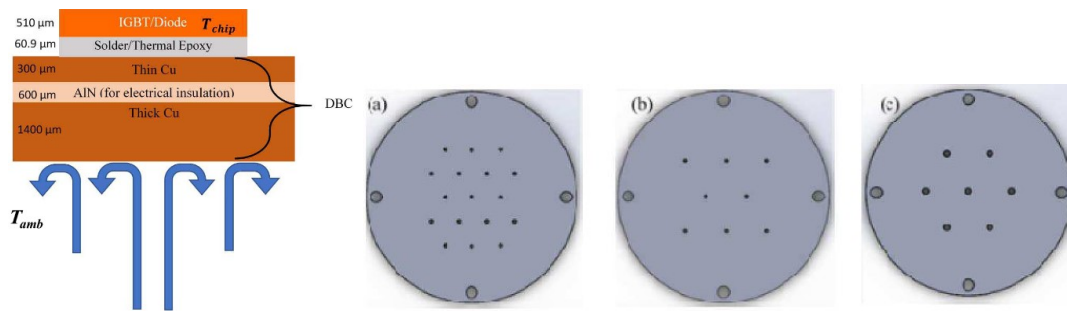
A schematic view of the integrated jet impingement cooler and jet array designs used for the test [97]
